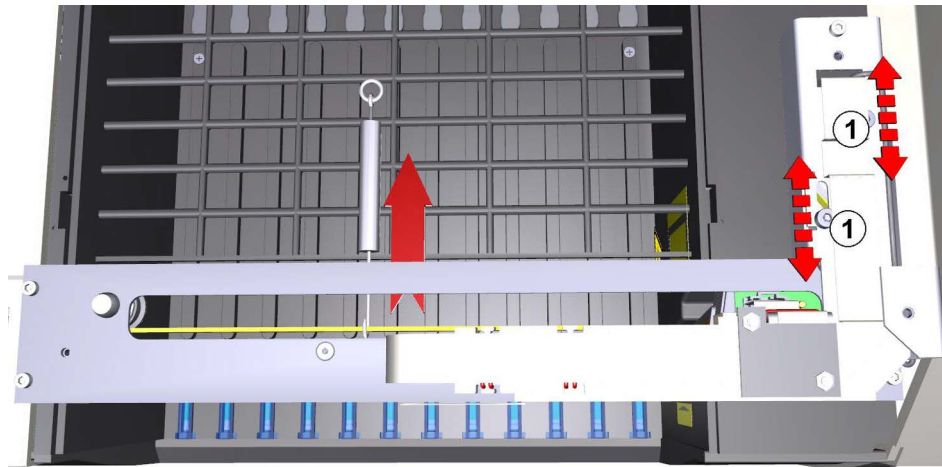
Adjustment of barcode scanner belt - motor screws
